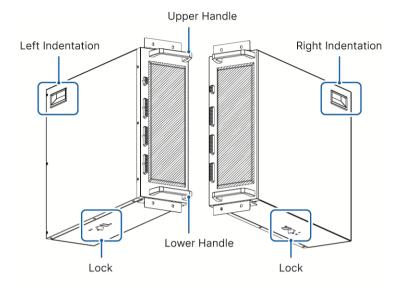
Install the Rodent Shields at the Rear Bottom)
